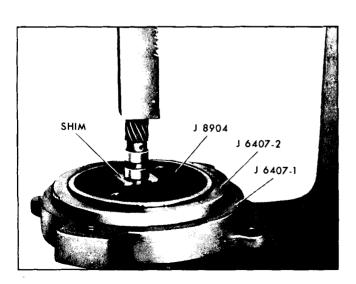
G-74 Pressing Governor Driven Gear into Sleeve
